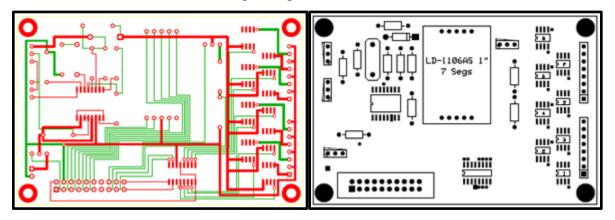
Second PCB Design Copper Layer (left) & Screen-print with Through-pads (right)
